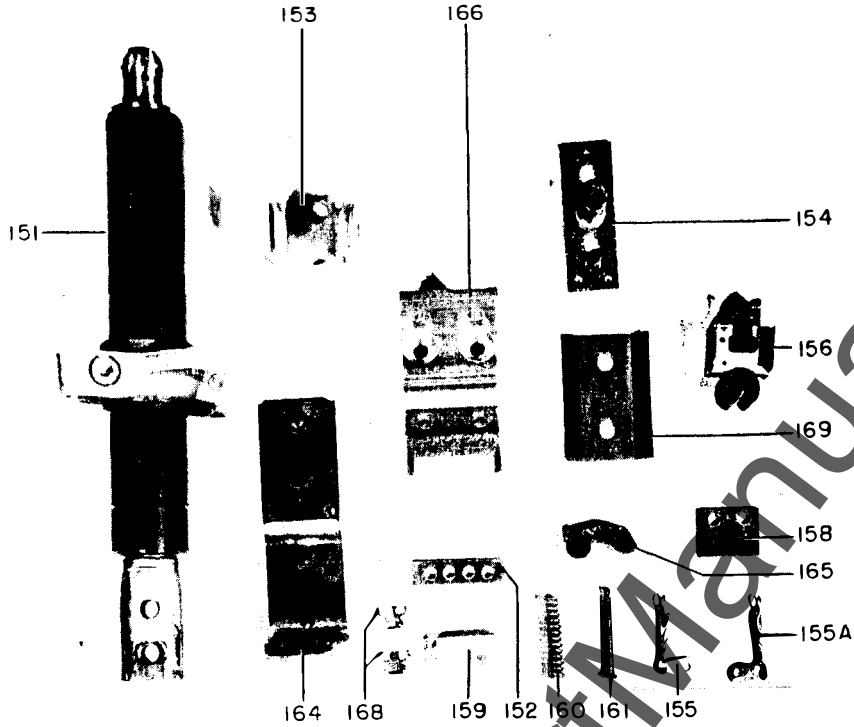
G Component Parts - 1200 Amp. Rear Bushing
